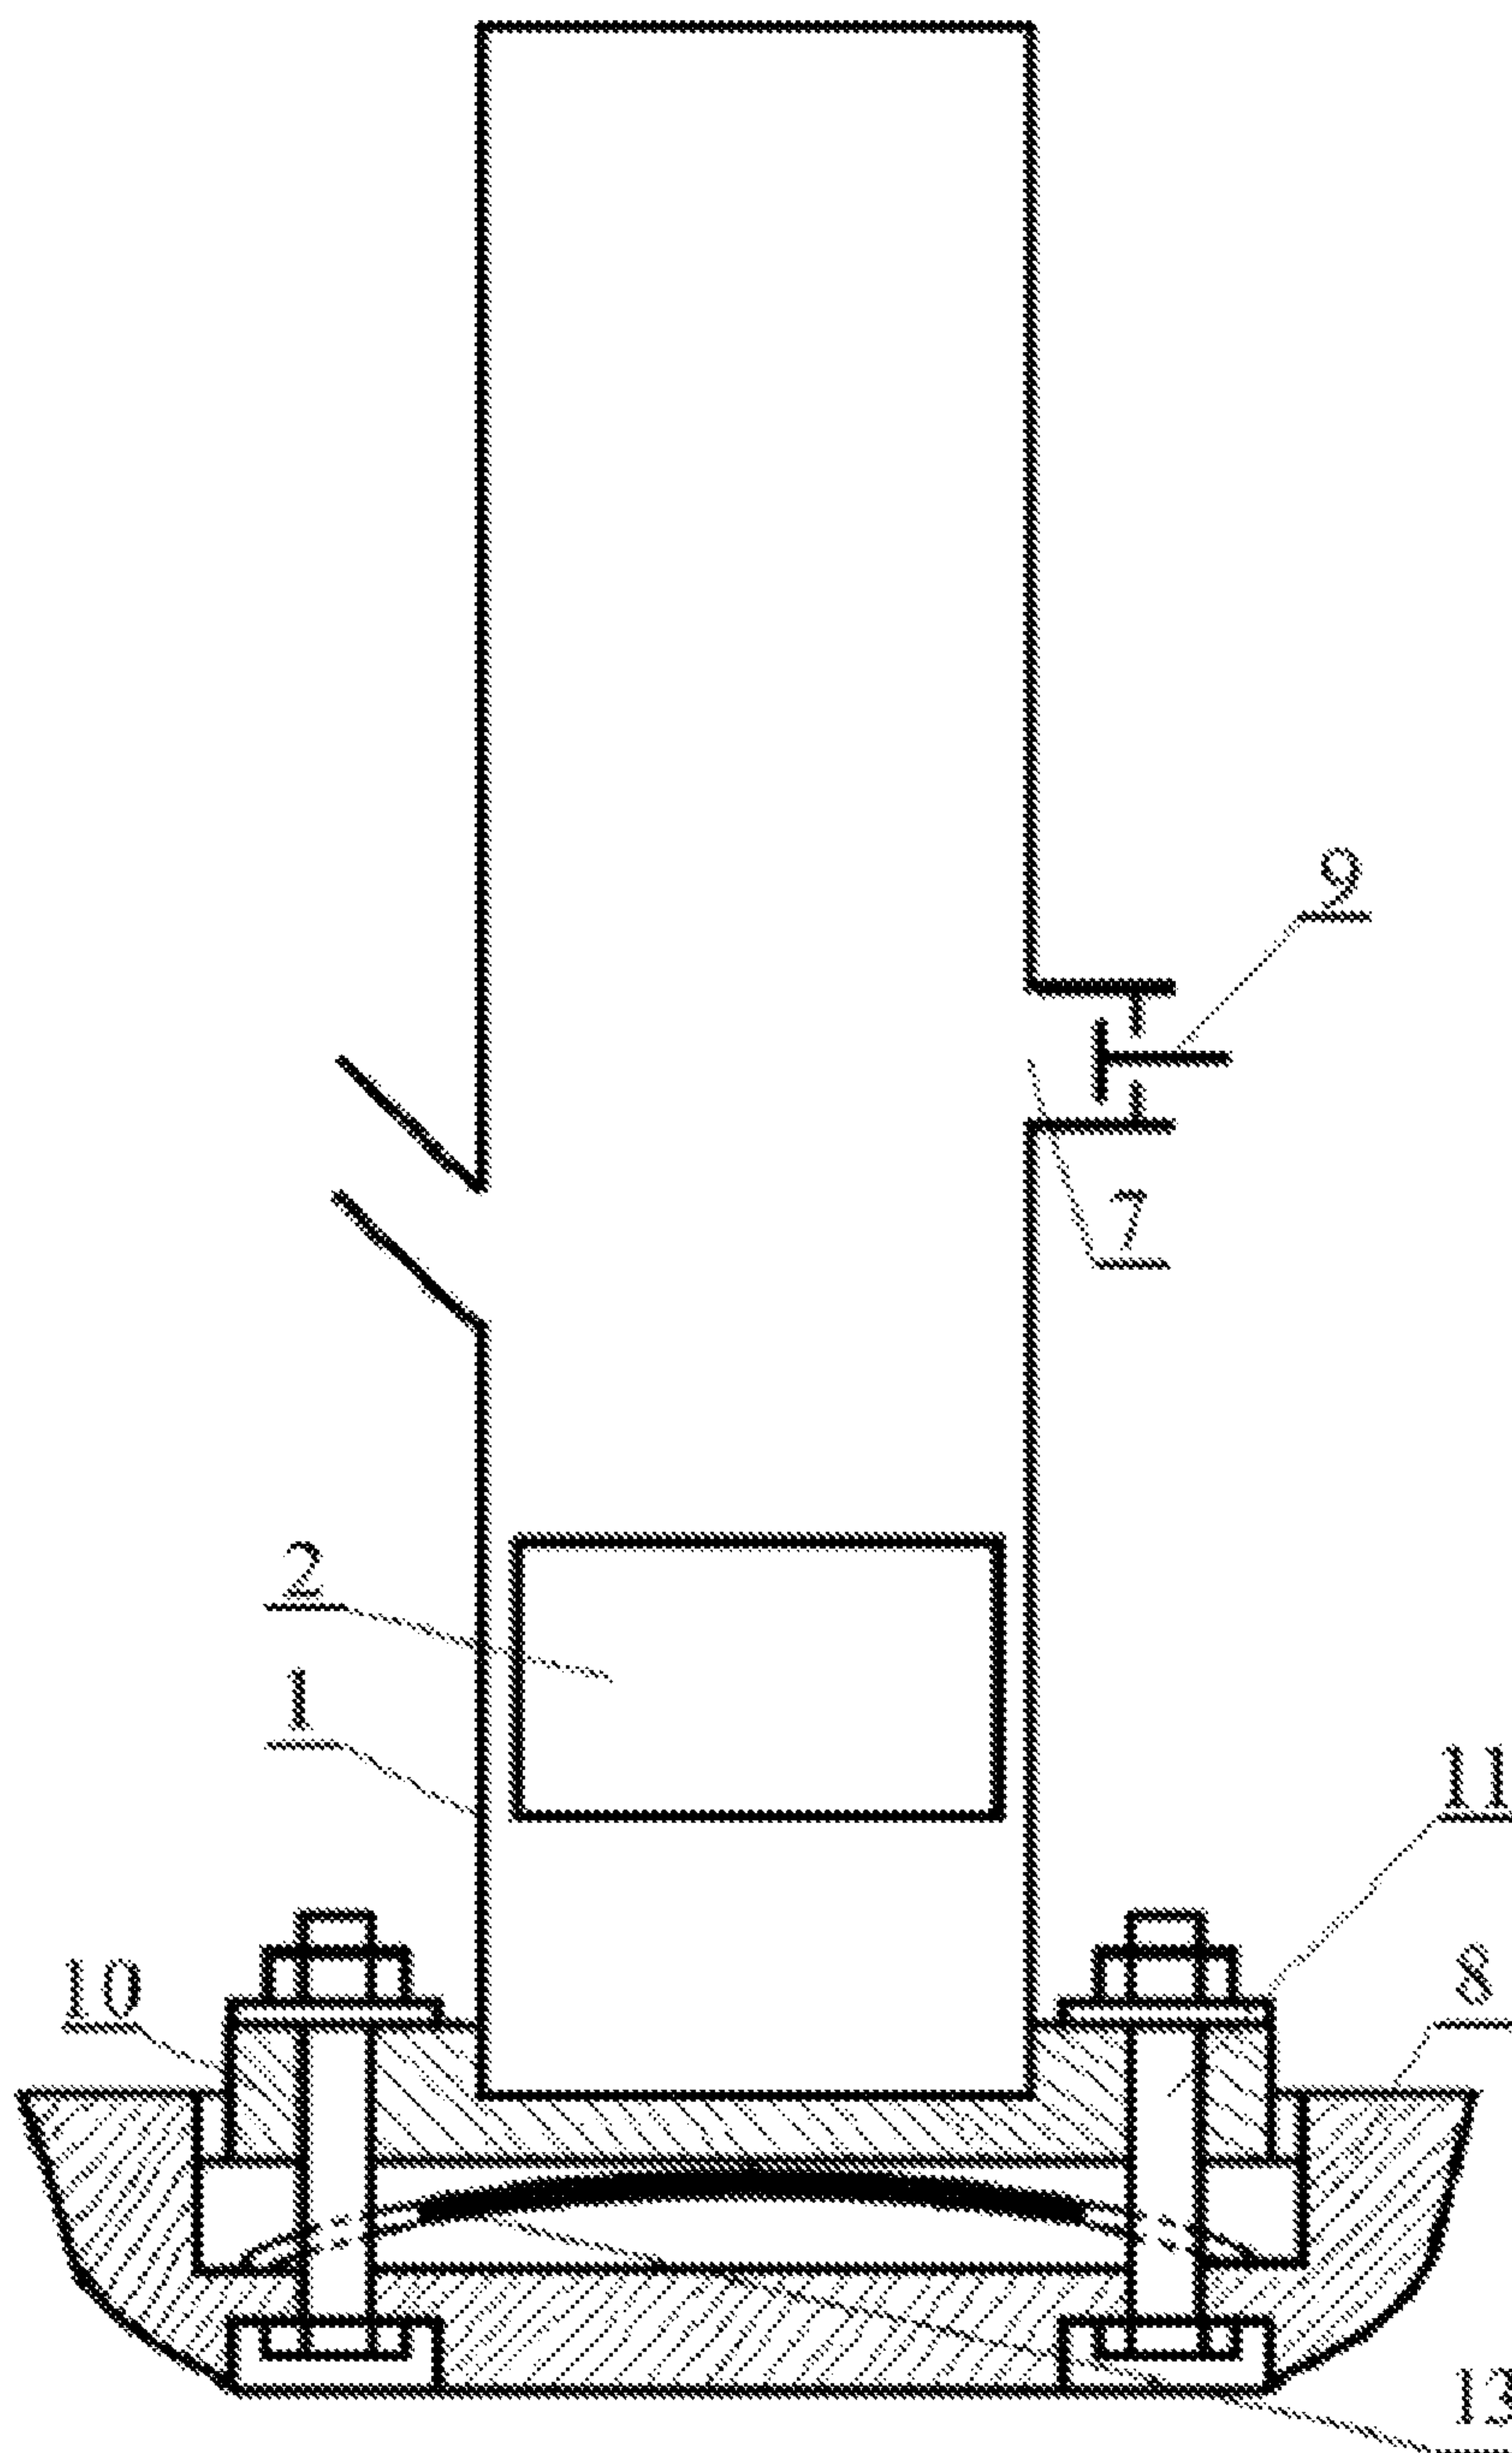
Cylinder 1 is connected to plate 8 through a spring 13.
